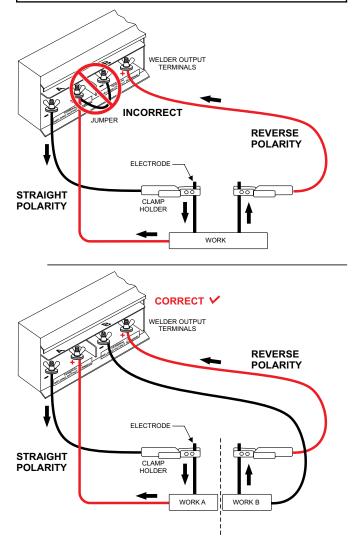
Welding Cable Connections (Electrode Type Correct)
